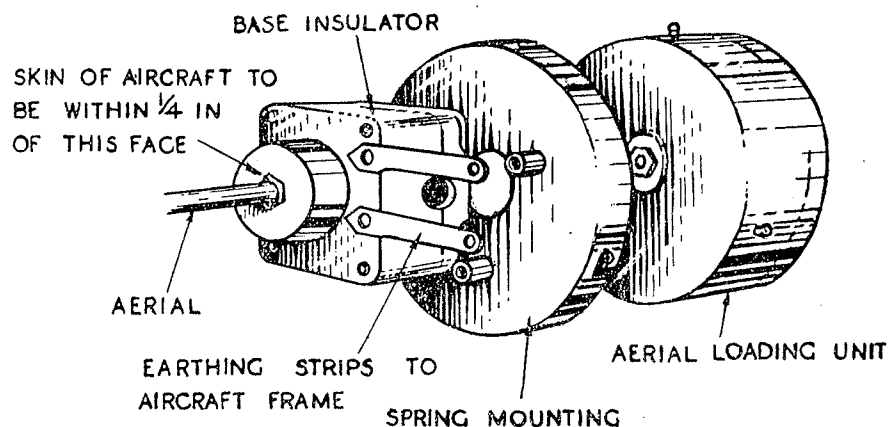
Exploded view illustrating attachment of loading unit to aerial.
